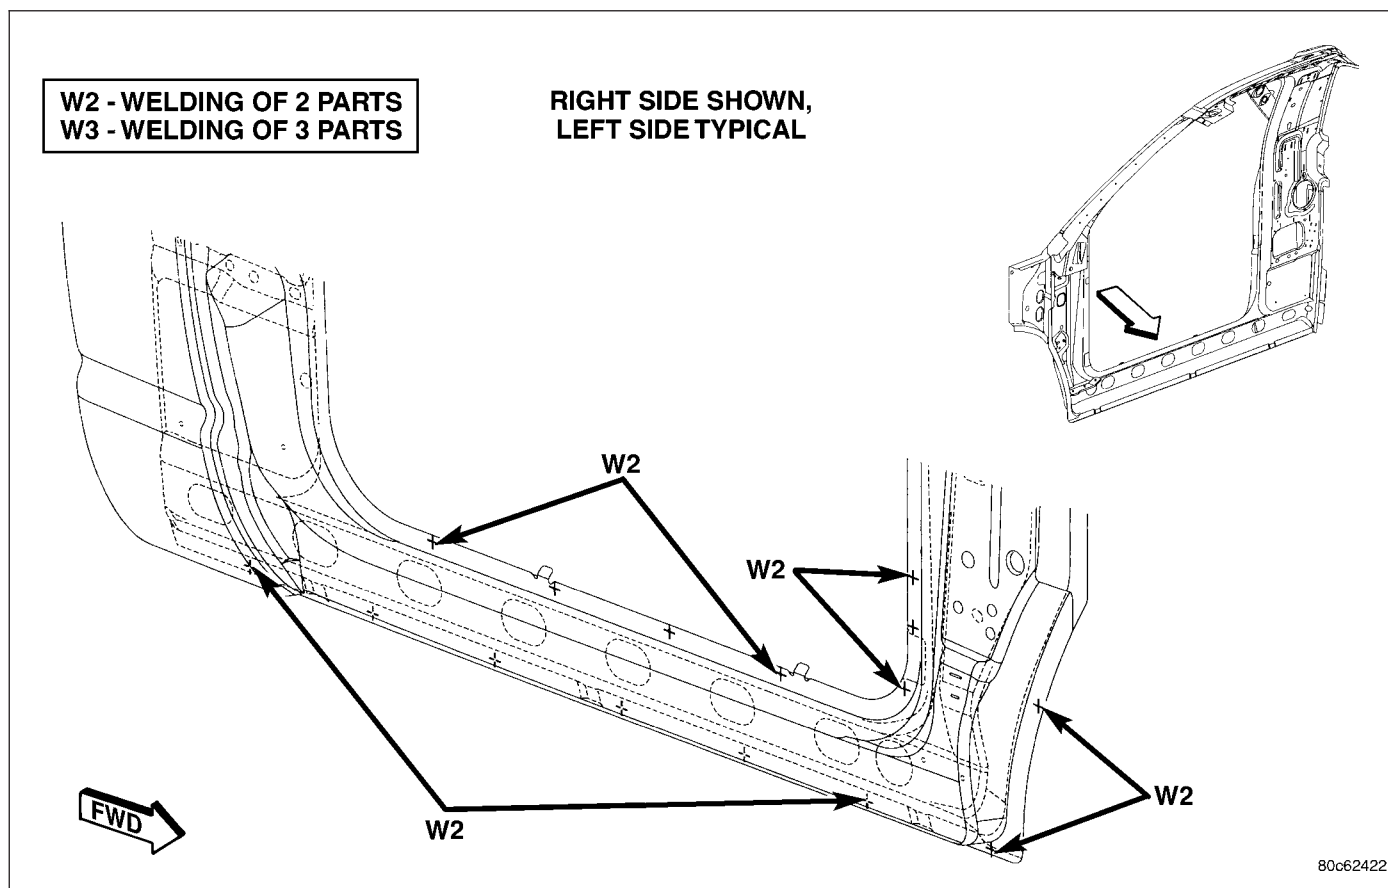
INNER BODY SIDE APERTURE - STANDARD CAB
